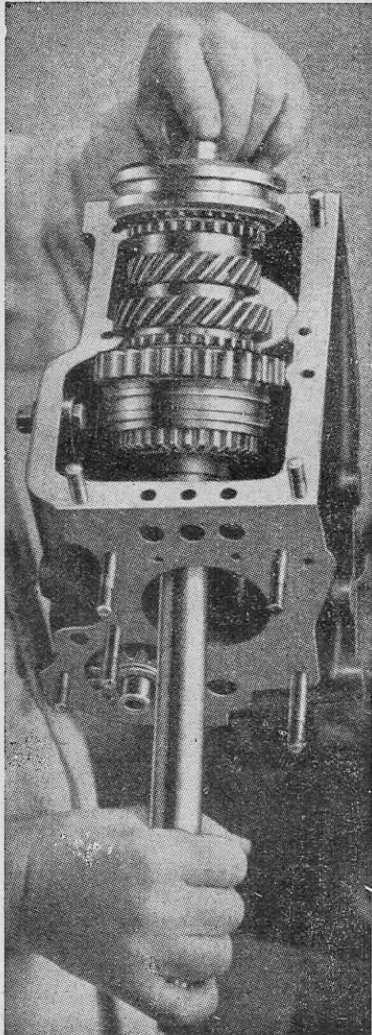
Showing the method of withdrawing the gearbox mainshaft assembly.
